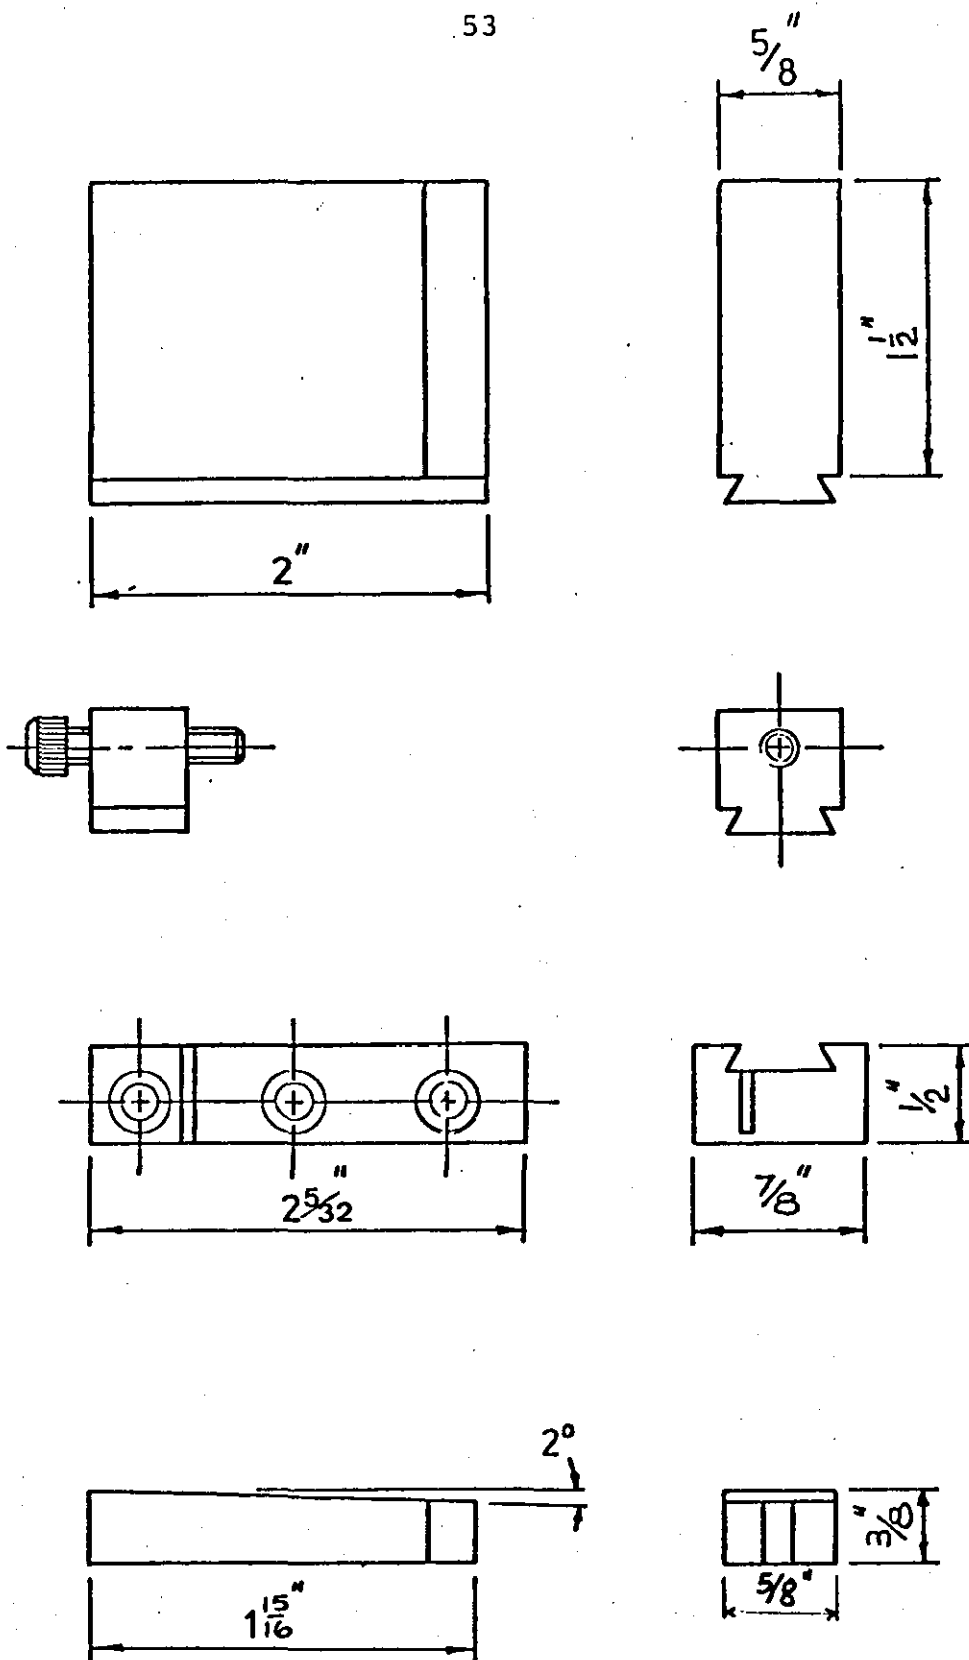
DETAILS OF JAW ASSEMBLY FOR
